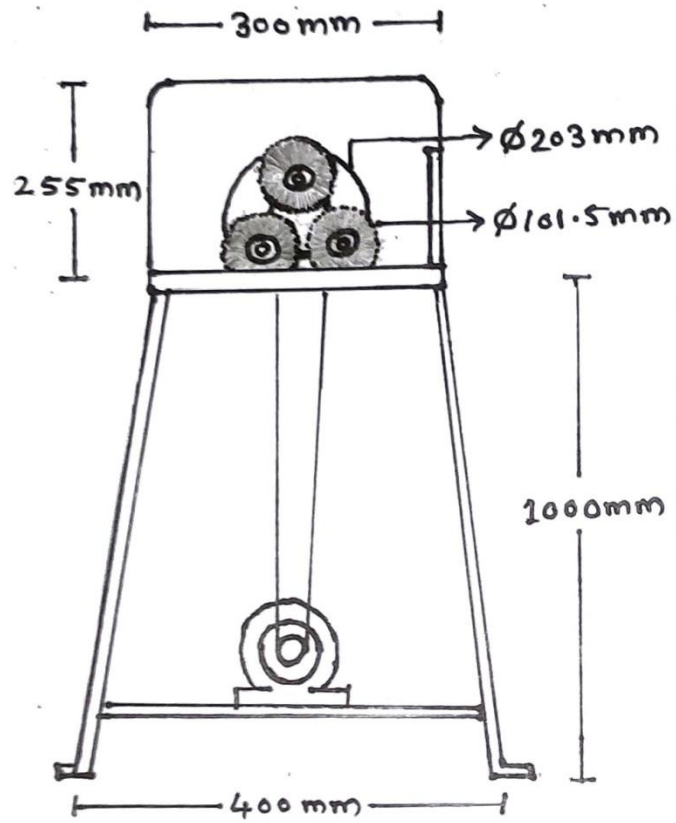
Front View of Sugarcane Peeler cum Cutter Machine
